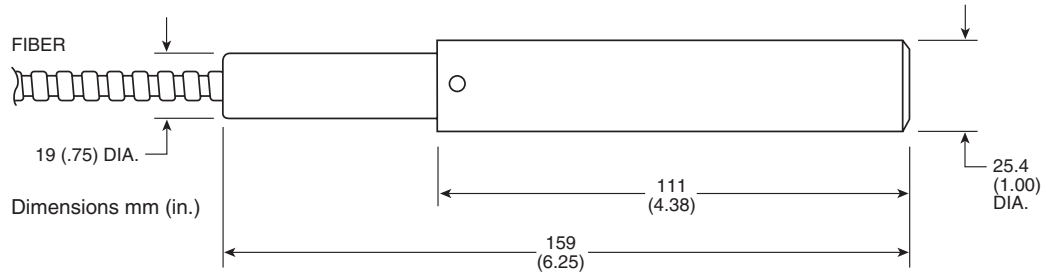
Optical Lens Assembly (L1) .25" @ 8" FOV
